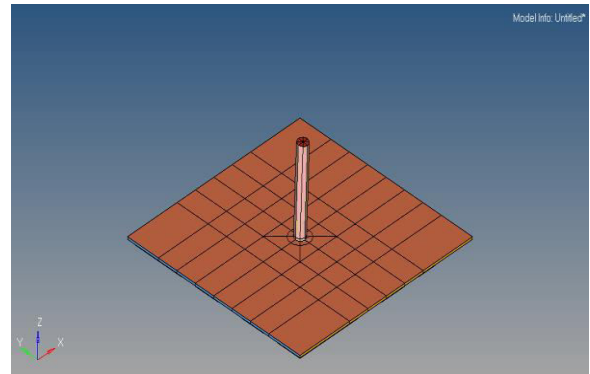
Friction Stir Weld model by HyperXtrude software.
